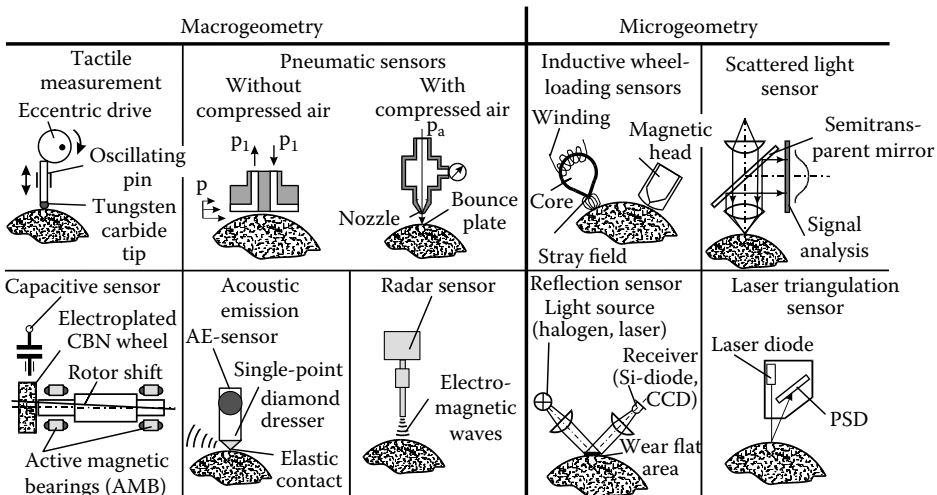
Sensors for grinding wheel topography measurement.
